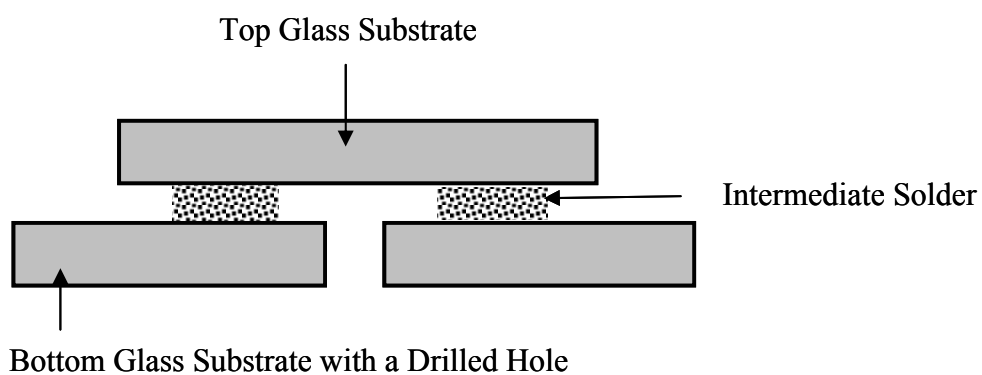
Cross section view of a bonded sample, showing a smaller top substrate and a larger bottom substrate with a hole drilled through its center
